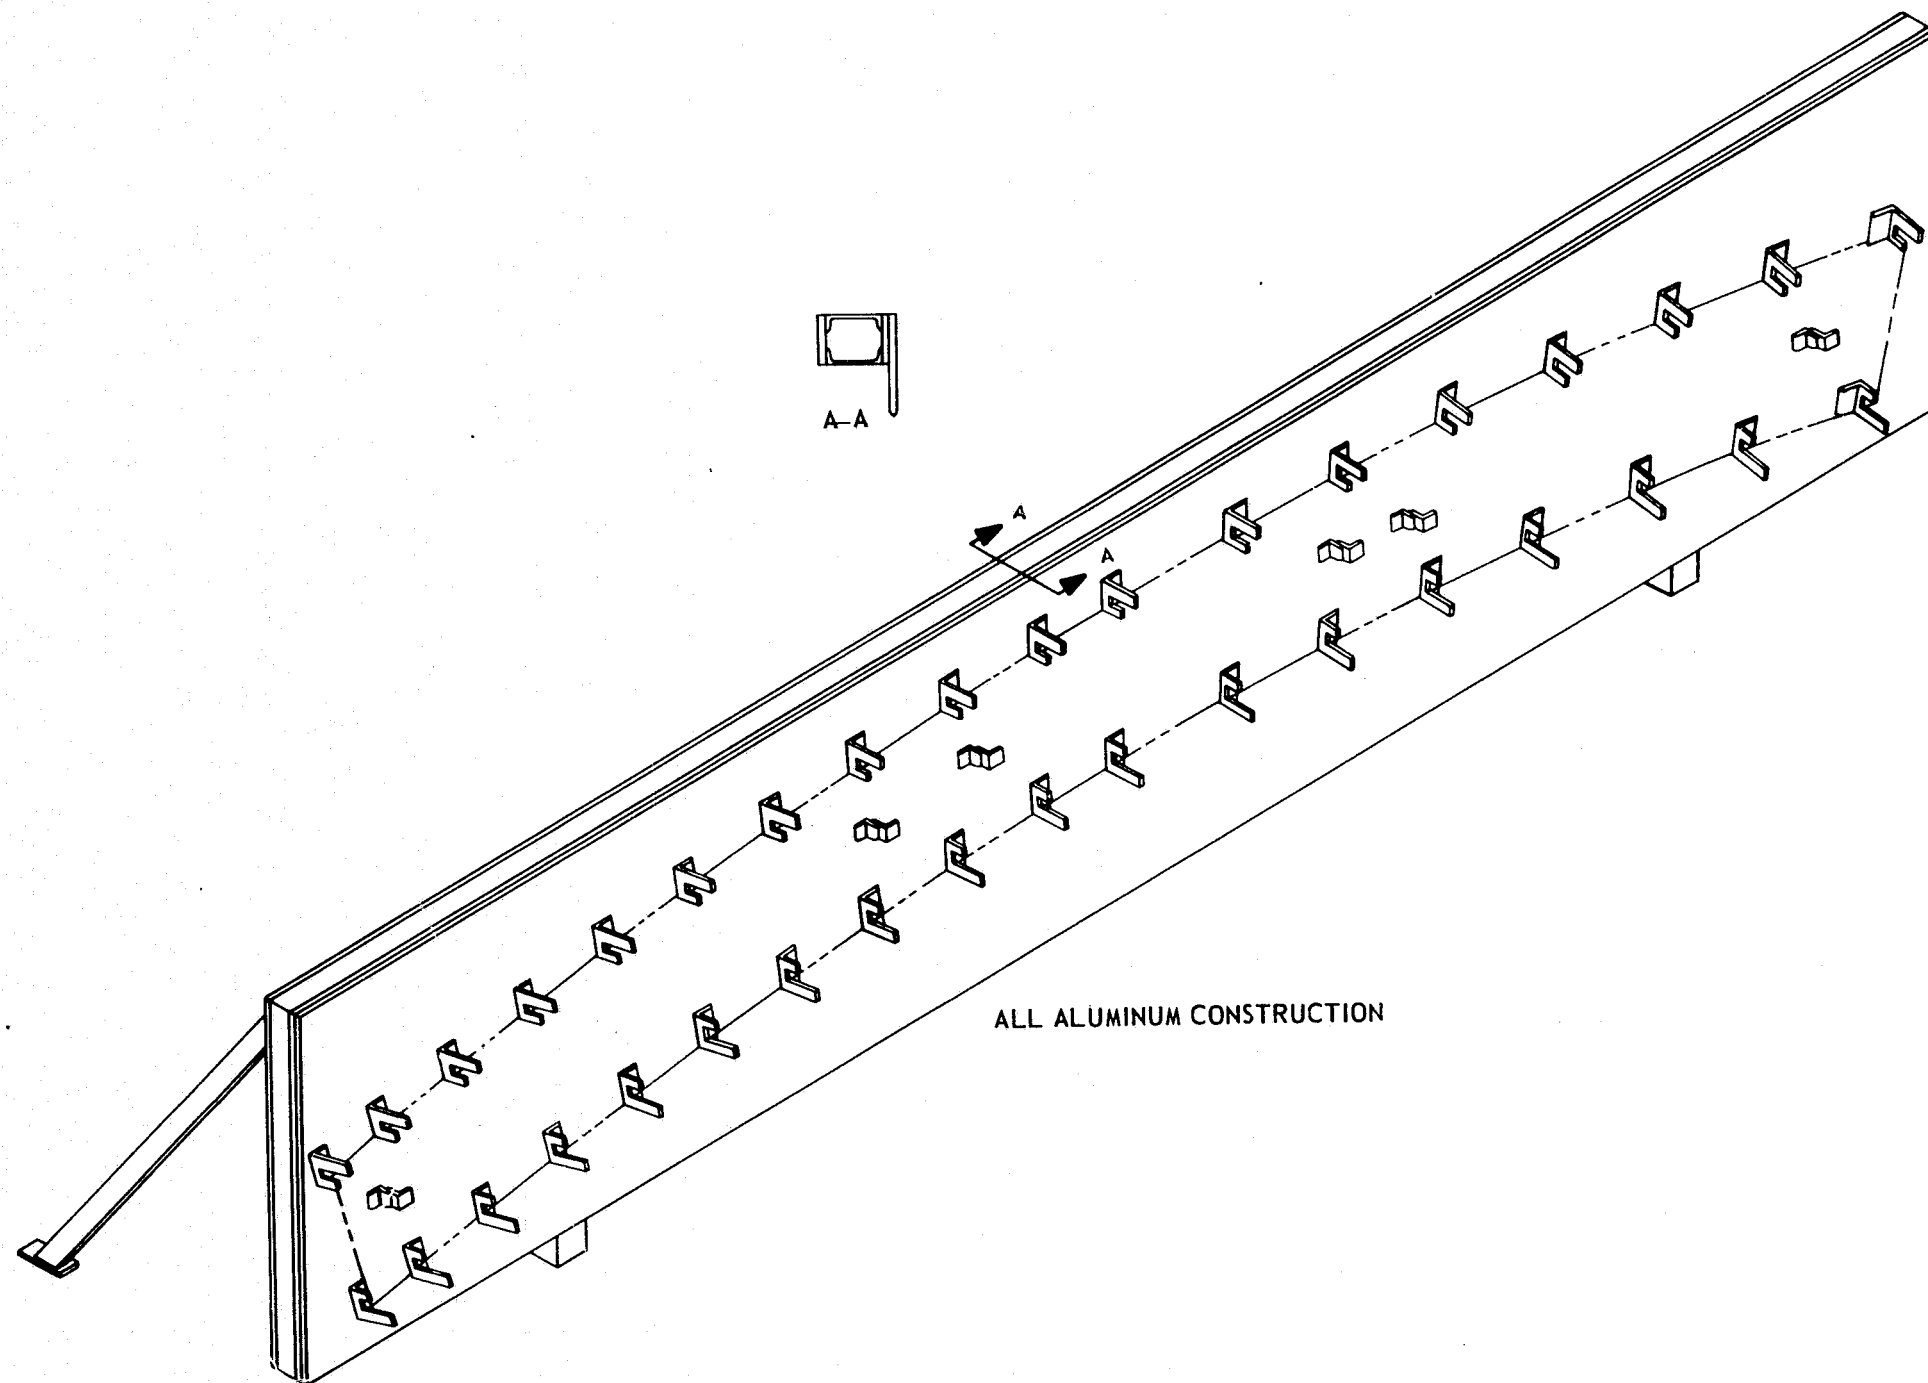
INTERMEDIATE RING SEGMENT SUBASSEMBLY FIXTURE
